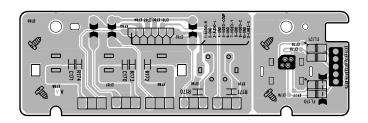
EU55 Front Jack PC Broad (Bottom side)
